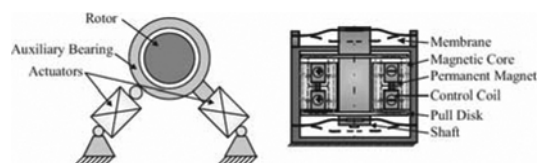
Rotor with active auxiliary bearing (left), Electromagnetic actuator (right).
